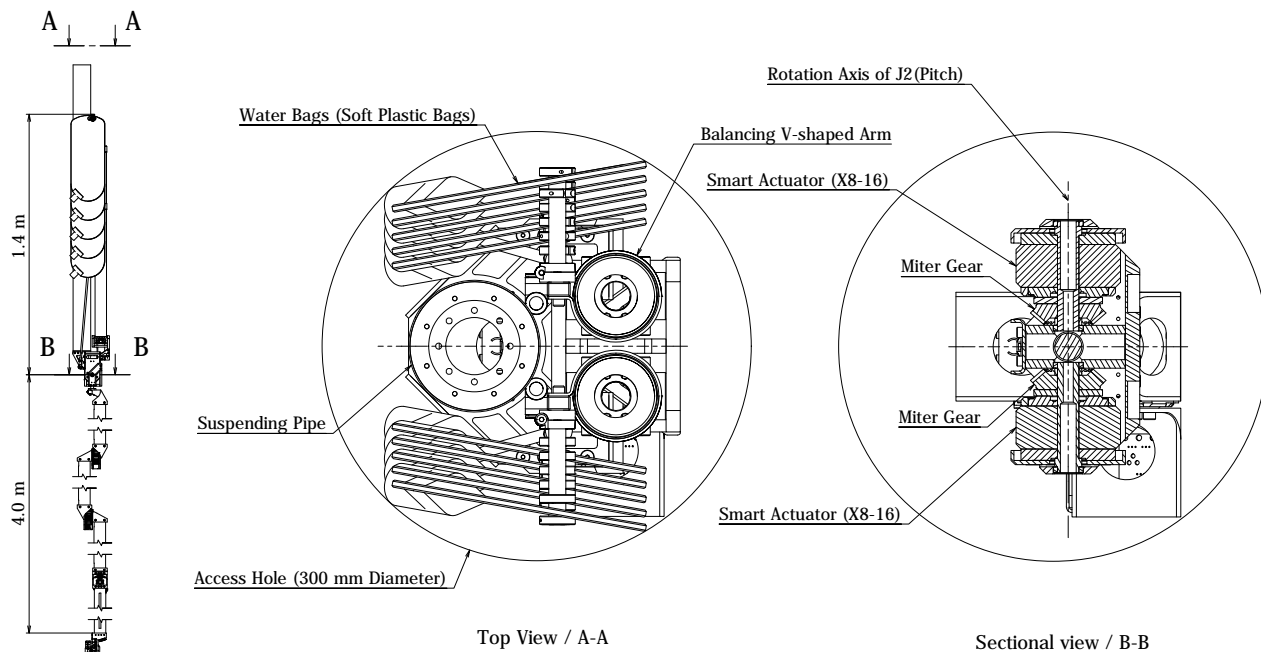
Top and sectional view of LIBRA-I in hole passing condition
